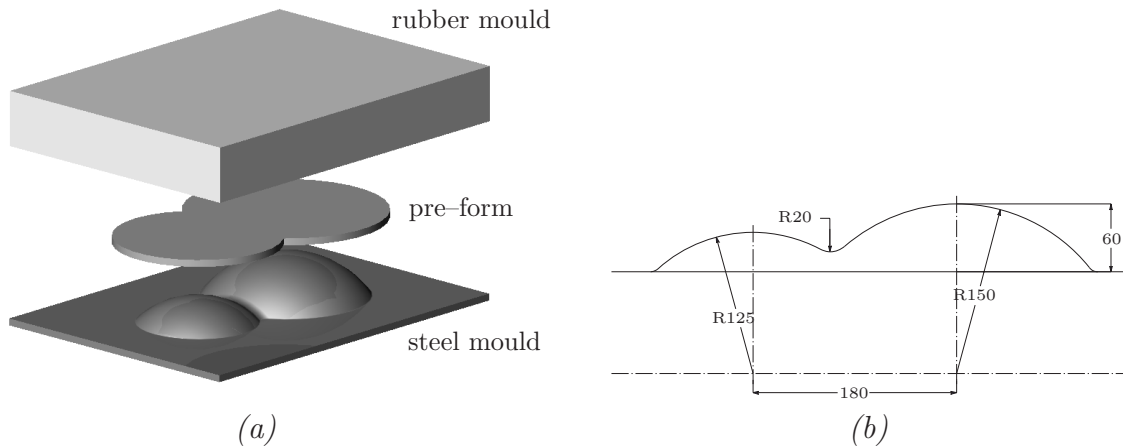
(a) Schematic view of the Double Dome rubber press tools and pre-form. (b) The dimensions of the lower steel mould in mm.
